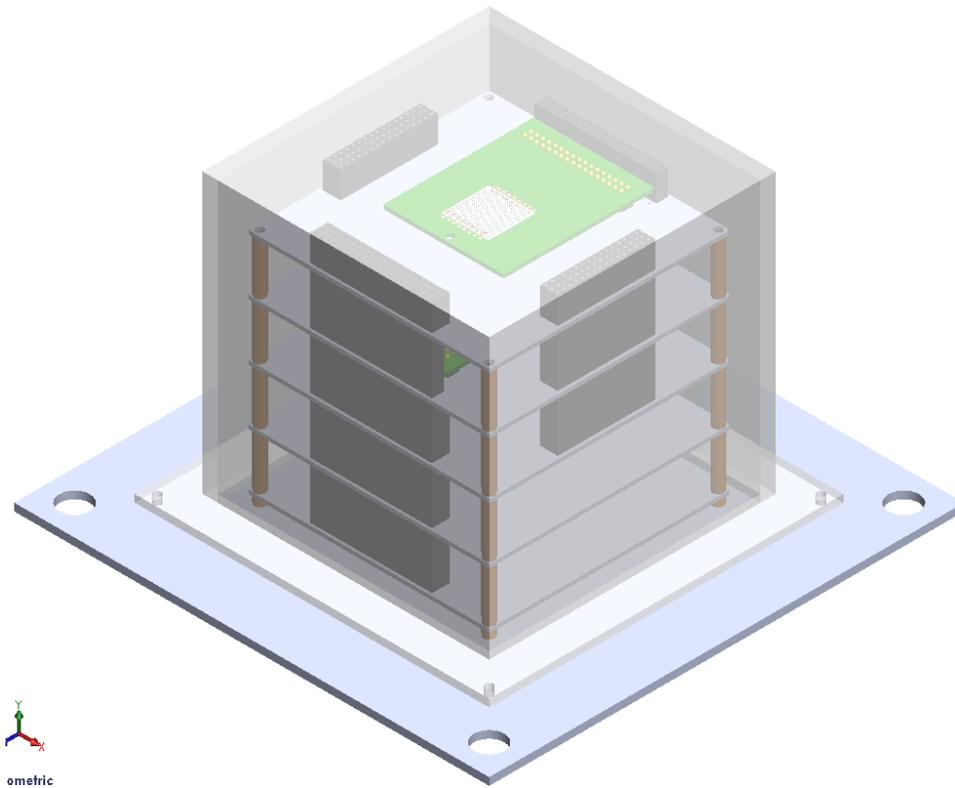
Isometric view of payload electronics stack and enclosure attached to HASP mounting plate.
